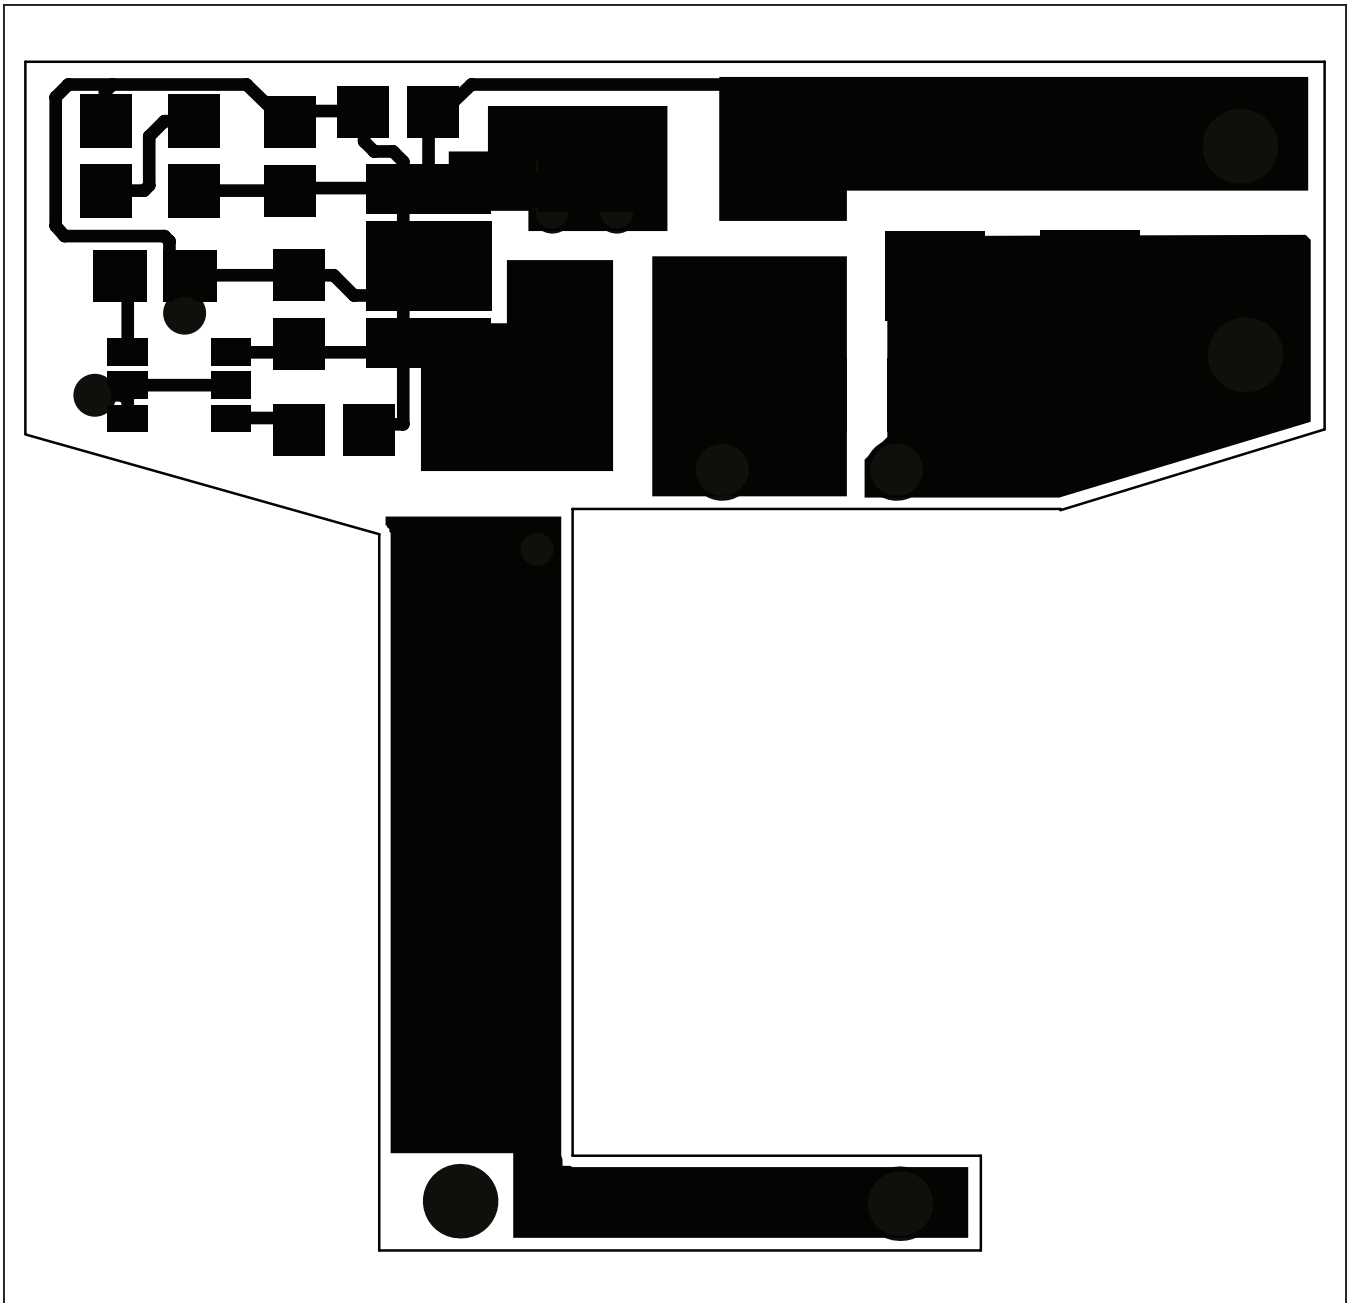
MAX16840L EV Kit PCB Layout—Component Side
